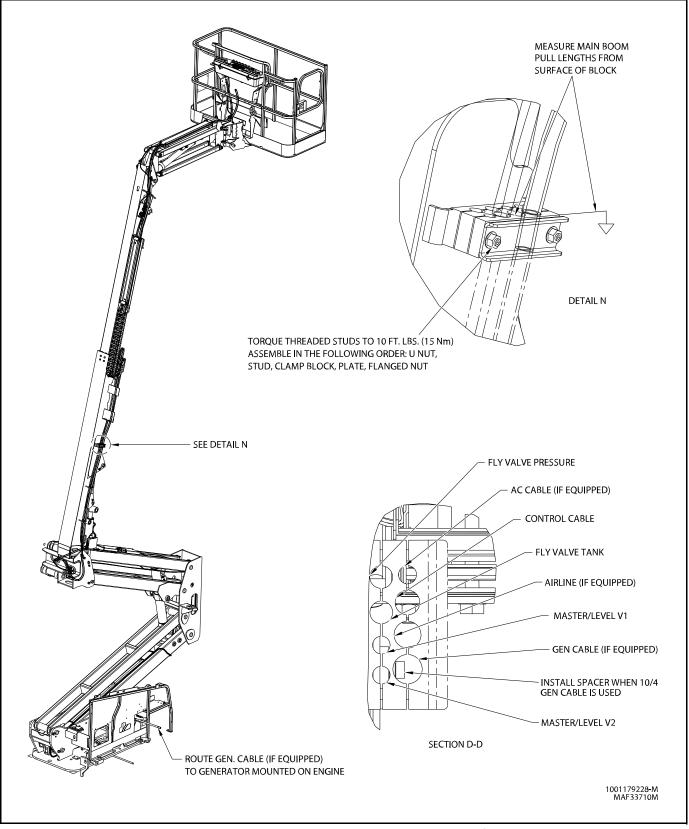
Cables and Clamps Installation - Sheet 4 of 8
